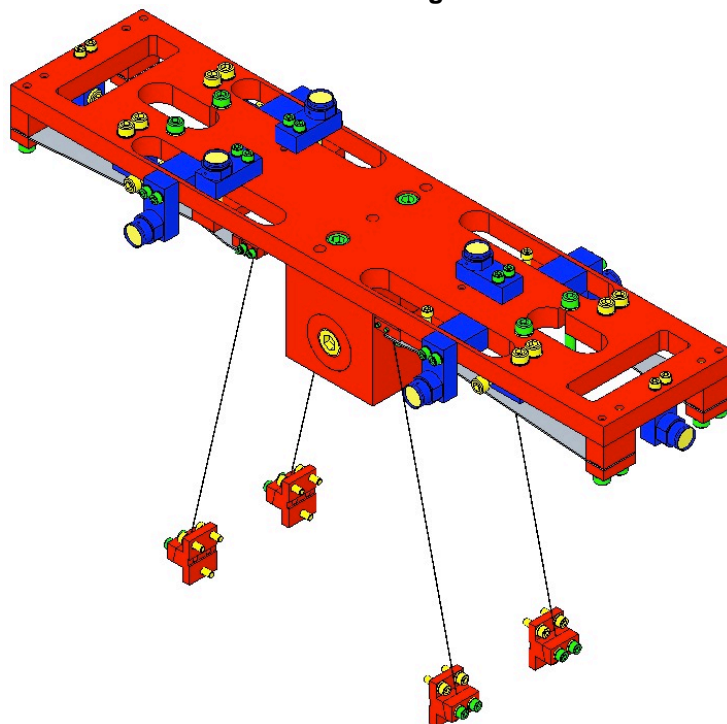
Upper Mass (Magnet Flags removed) with Lower Wires
